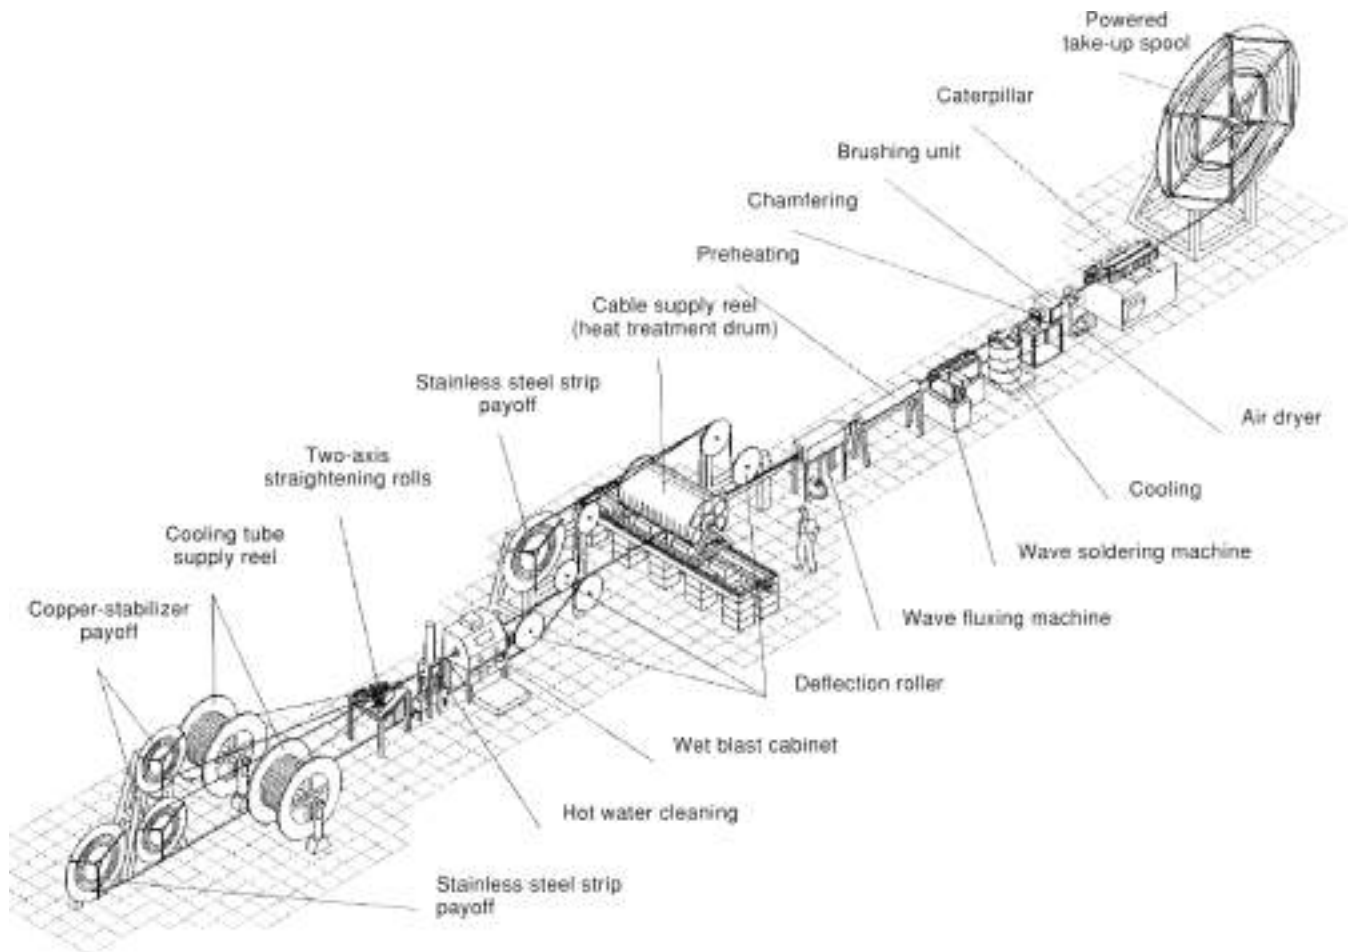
The milling-soldering line for the final assembly of the  $Nb_3Sn$  react-and-wind conductor for SULTAN (courtesy of G. Pasztor, CRPP).
